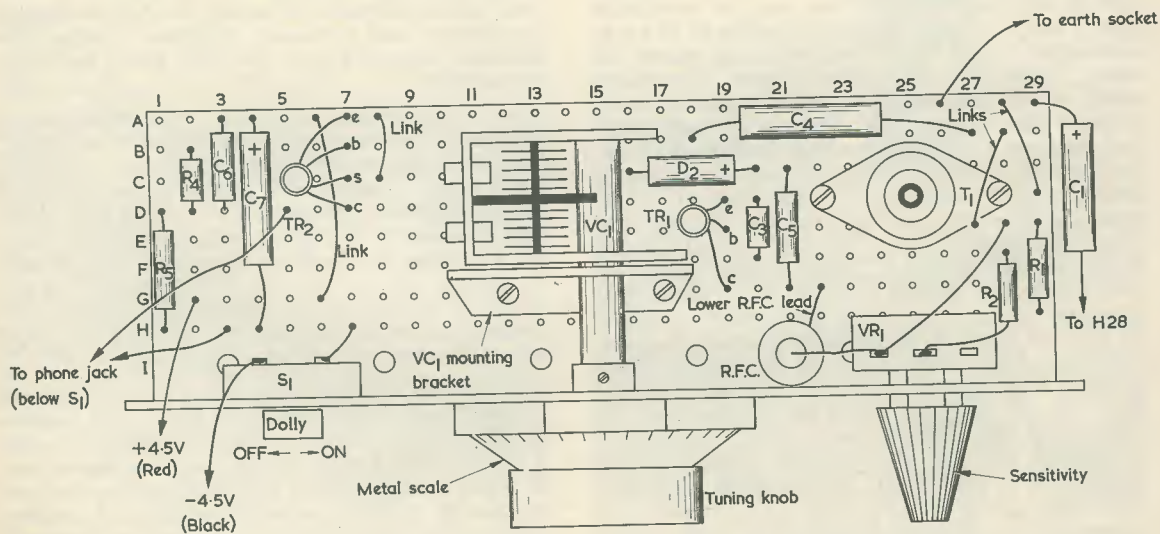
The layout above the board. The tuning capacitor frame is earthed via its metal bracket and mounting nuts and bolts to strip G. Ensure that the mounting bolts pass through the board at positions G12 and G17 and that the nuts do not contact strips F or H
